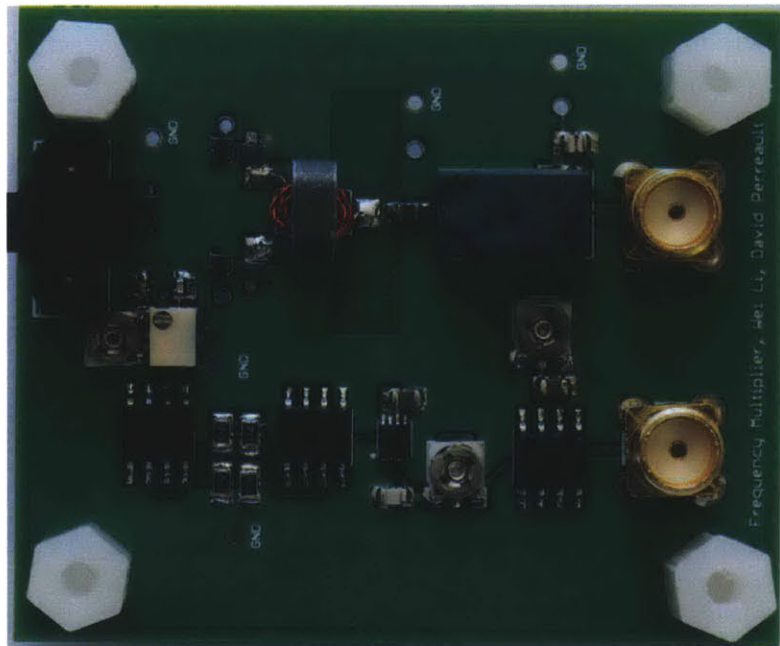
The picture of the frequency multiplier PCB prototype.
